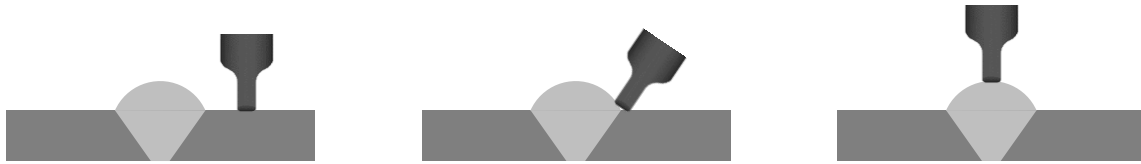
Probe tip position on the weld. Flat on in the HAZ (left), with an angle on the toe (center), and flat of the top of the weld (right).
